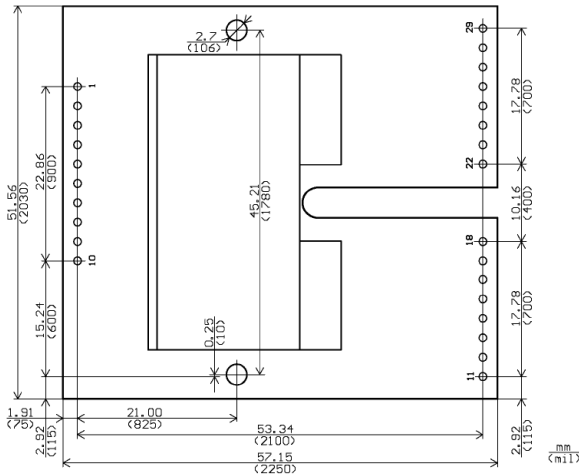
Dimensions of a standard CONCEPT gate driver core
